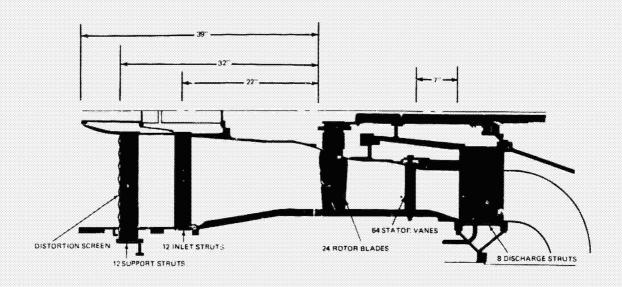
Cross-Section of Test Compressor for Radial Distortion Tests
